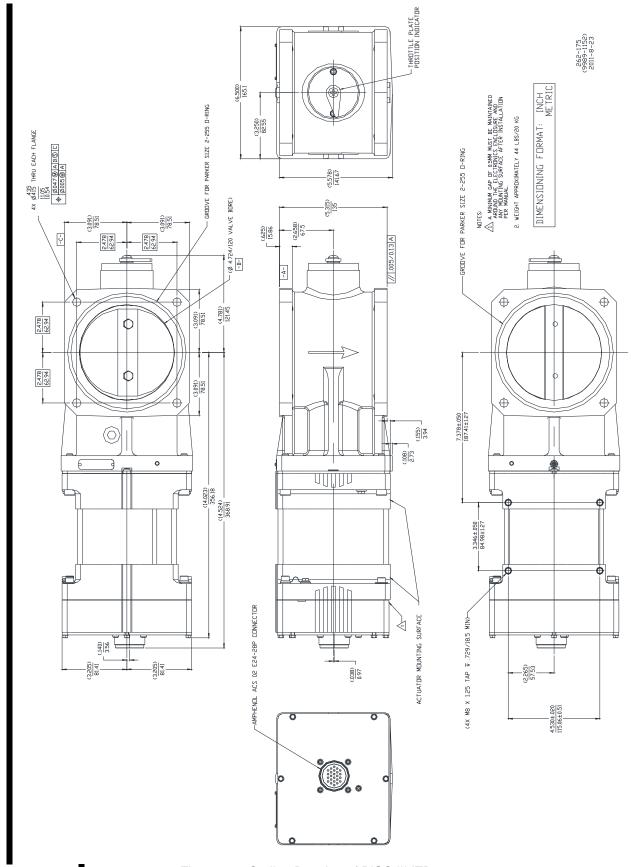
Outline Drawing of PISC III ITB 120 mm
